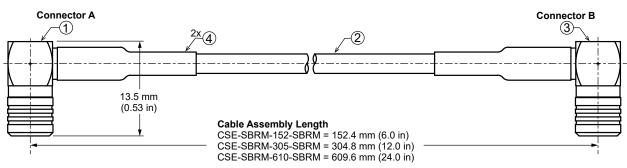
Product Dimensions for the CSE-SBRM-ccc-SBRM Cable Assembly
